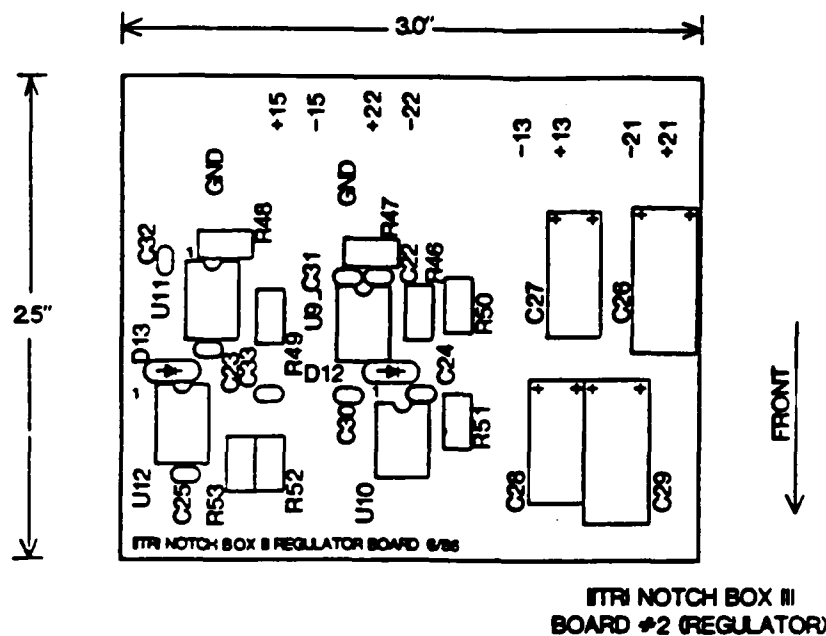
NOTCH BOX III REGULATOR PC BOARD, COMPONENT LAYOUT.
